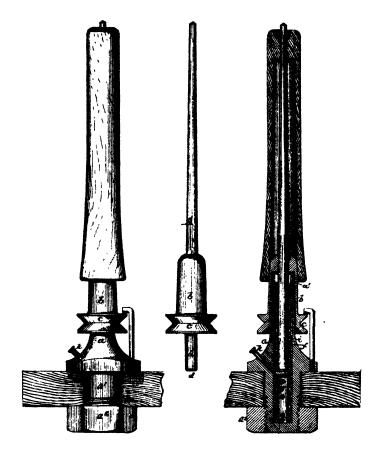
Rabbeth Spindle with Yielding Bolster, 1880
